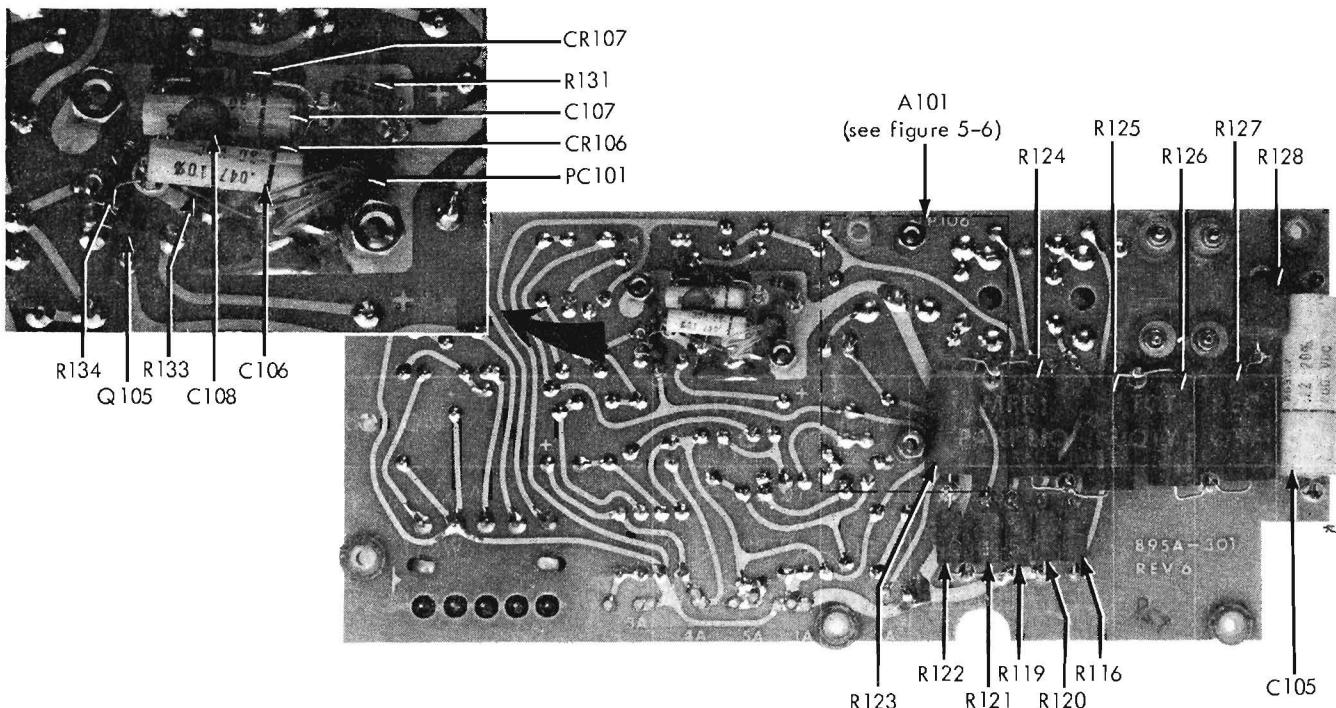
REFERENCE SUPPLY BOARD ASSEMBLY (Sheet 1 of 2)
